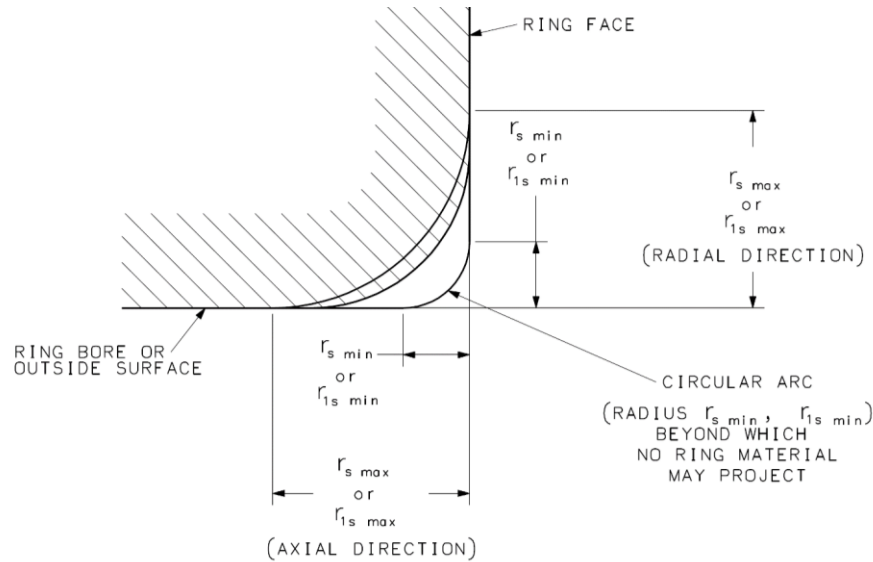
INNER AND OUTER RING CHAMFER DIMENSIONS
